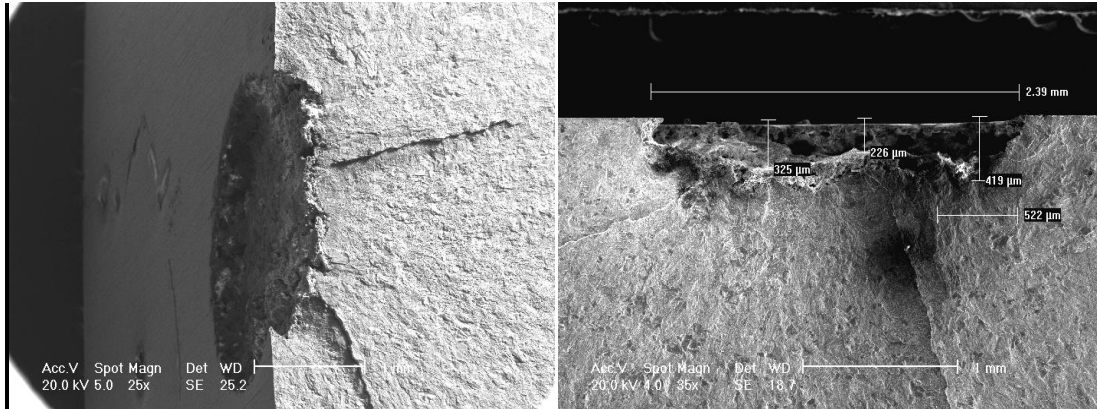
Specimen 21 – Different views of the fracture surface of the flaw where the fatigue crack initiated
